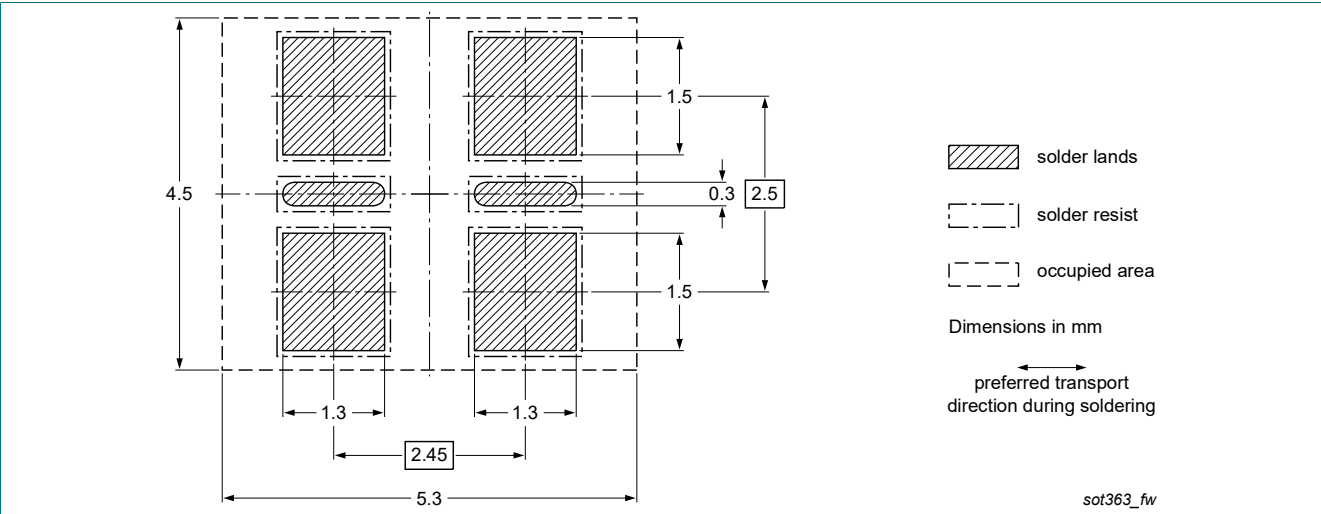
Wave soldering footprint SOT363 (SC-88)
